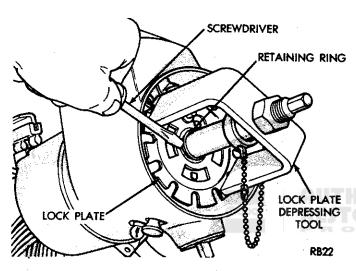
Removing Lock Plate Retaining Ring Using Tool C-4156
